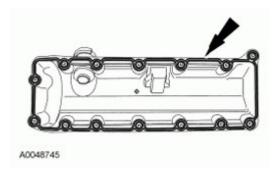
Identifying Adhesive Applying Area Around Gasket Courtesy of FORD MOTOR CO.
